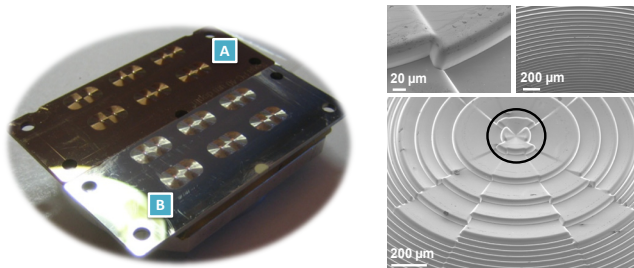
Fresnel lenses moulds used for the replica casting investigation. Left: (A) Ni insert with TiN coating, (B) Ni insert. Right: overview and details of one lens. The circle highlights the investigated centre geometry.
